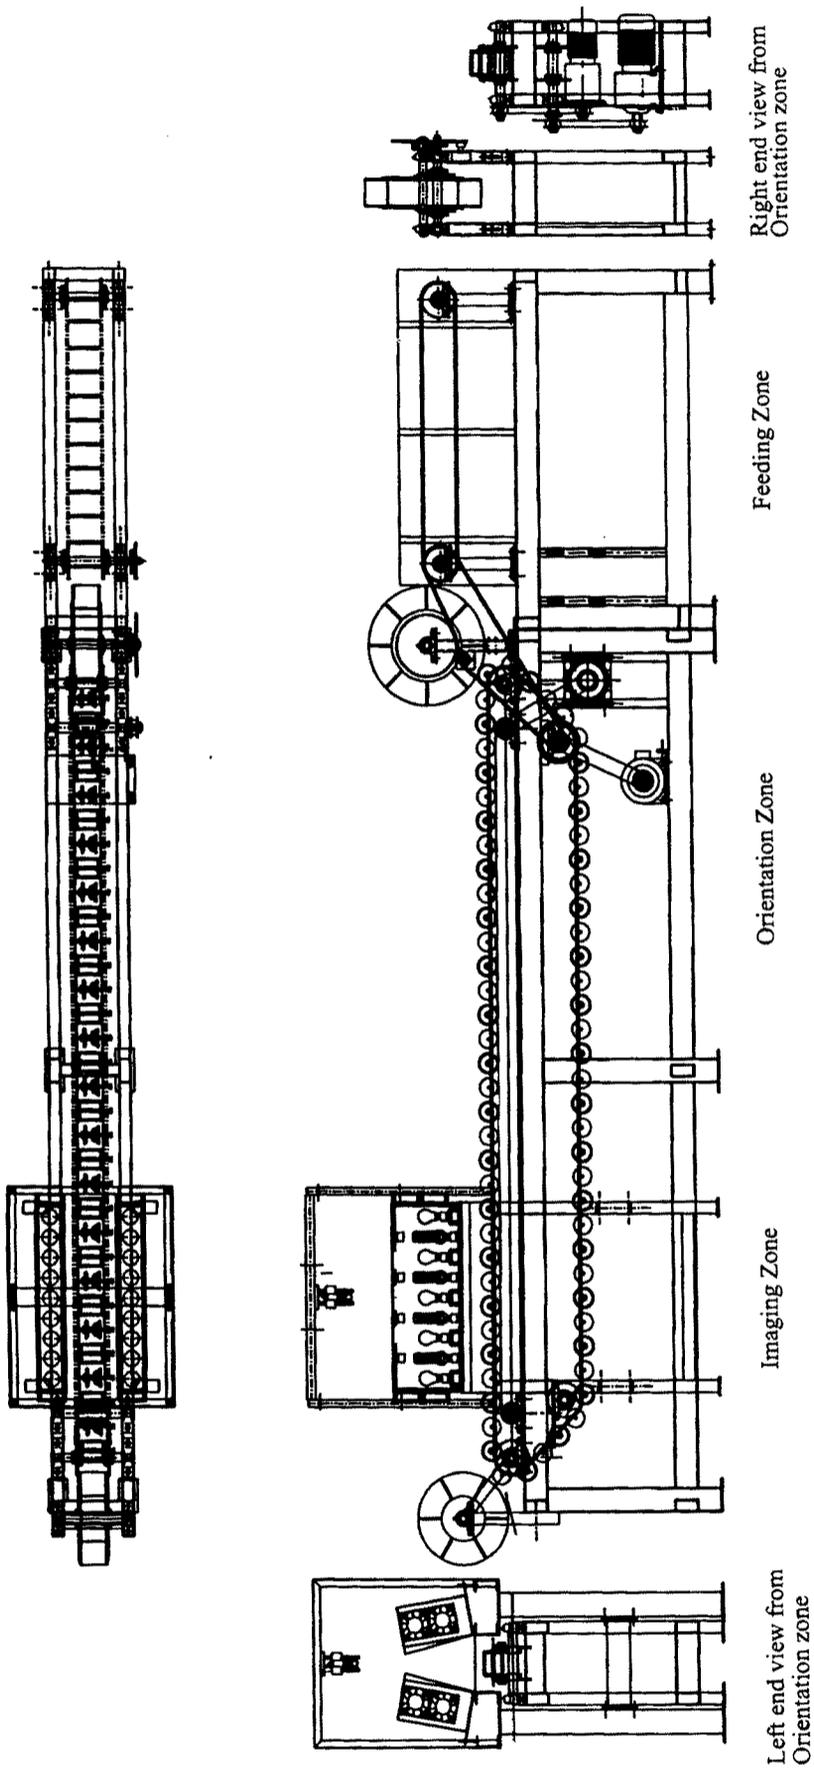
Mechanical Assembly of Fruit Feeding, Orienting and Conveying Sections
